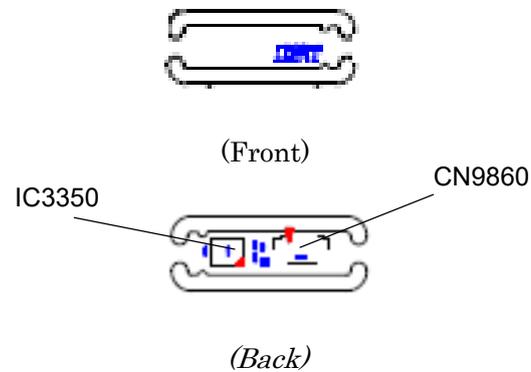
Sensor board (FDIASE*/FDI3SE*) layout
